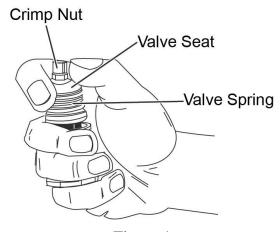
Thermostatic Oil Cooler Bypass Valve Crimp Nut
